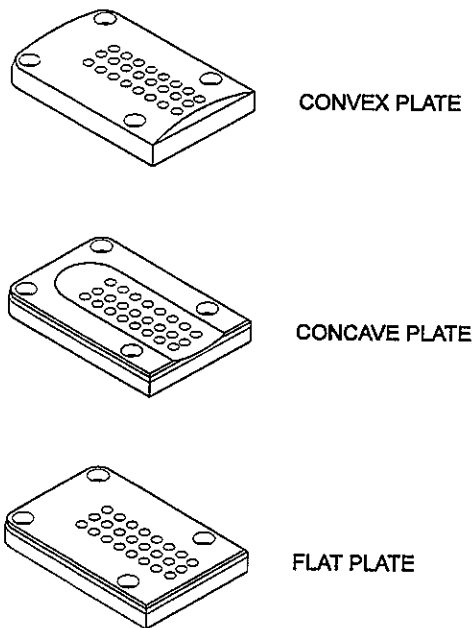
Vacuum Plate Selection including flat, convex, and concave plates.
